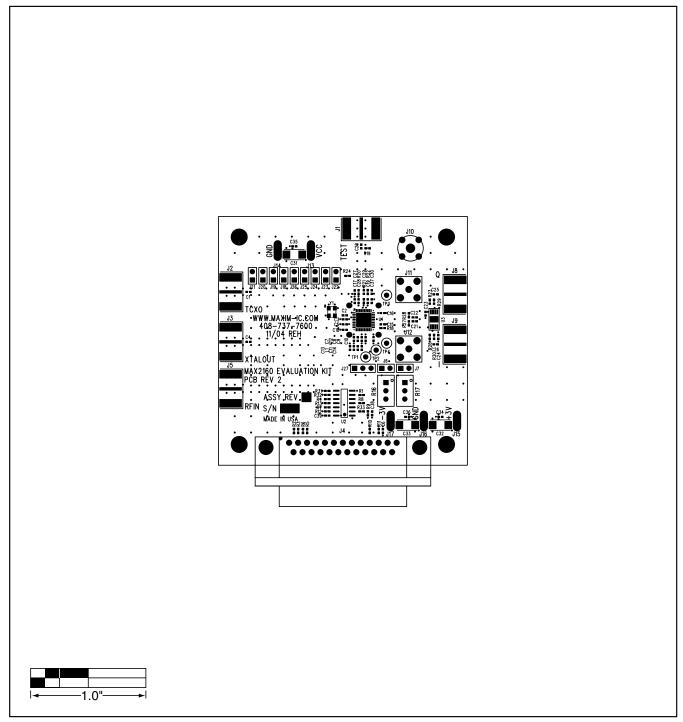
MAX2160 EV Kit PC Board Layout—Component Placement Guide
